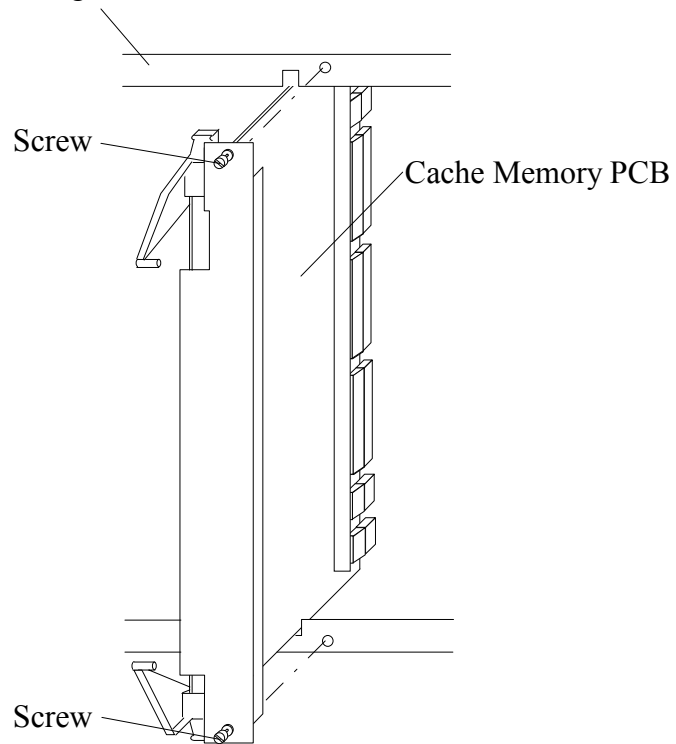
Removal of the Cache Memory PCB
